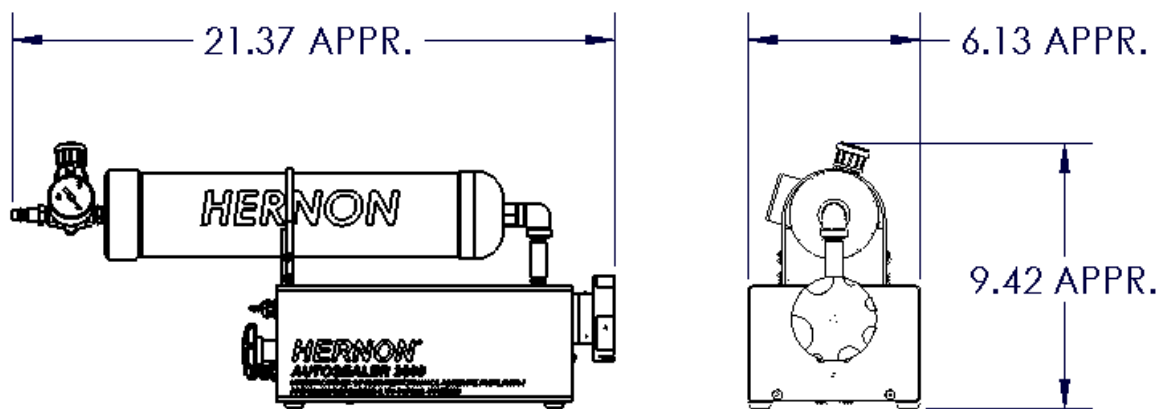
Case Dimensions, with 850ml cartridge retainer.
